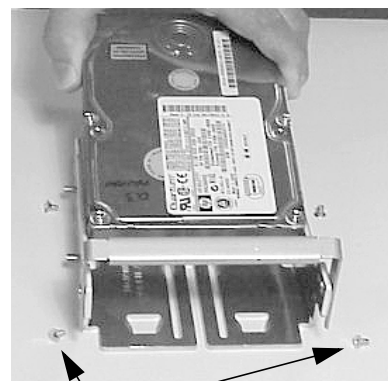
Removing the Hard Disk Drive from the Hard Disk Drive Bracket
